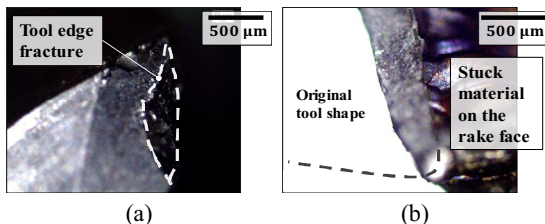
(a) Fractured tool edge and (b) an example of built-up-edge formed during the machining of titanium alloys (Ti-6Al-4V)
